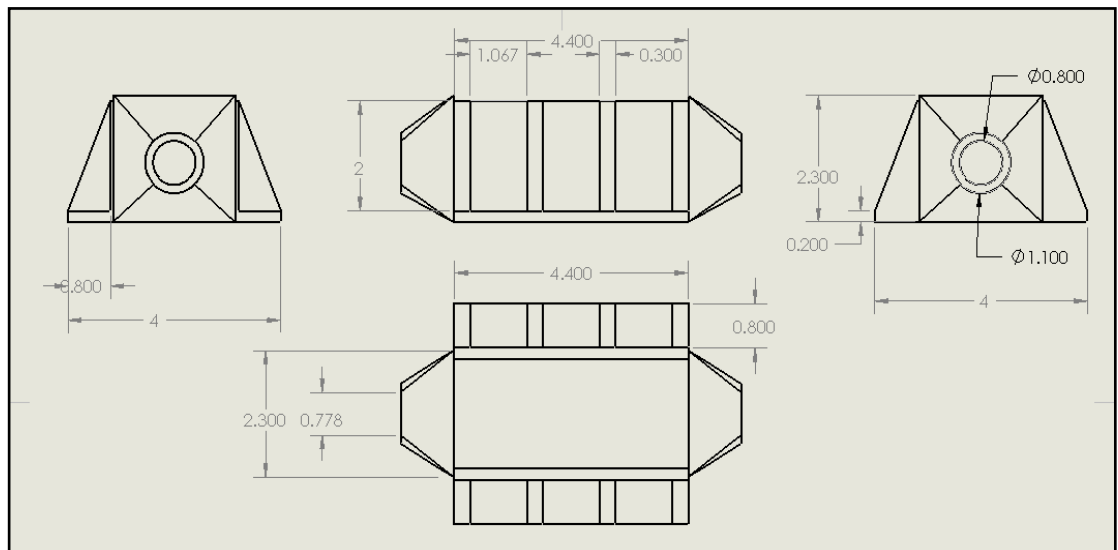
Double Tank Circular Diffuser Design 2D view (Tank 1)
